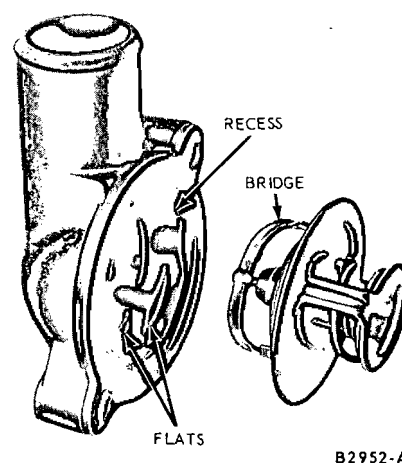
Installing 6-Cylinder or 289-V8 Thermostat
